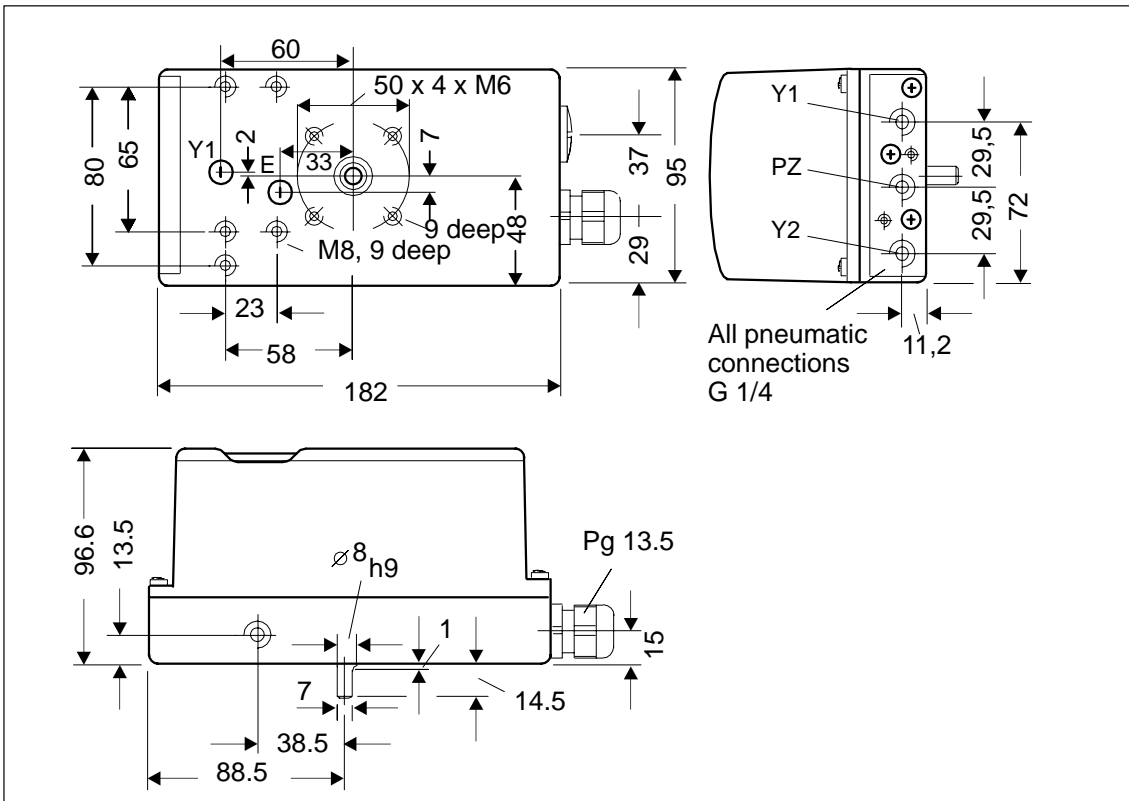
Dimension drawing of plastic housing version 6DR4x00-xx
